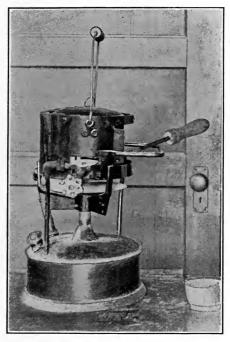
Gasoline Fire Pot for Heating Soldering Irons.
